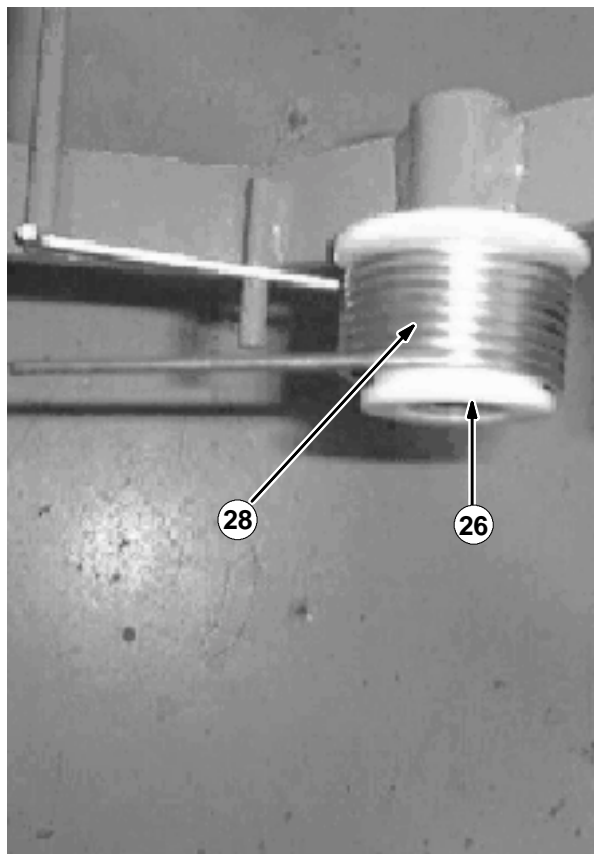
LIFT ARM WELDMENT INSTALLATION
